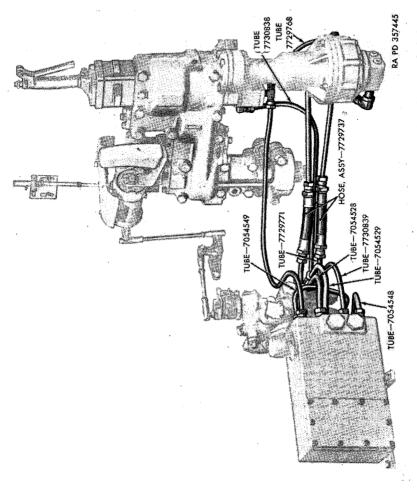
Front view of hydraulic turret traversing mechanism tubing, hose, and fittings.
